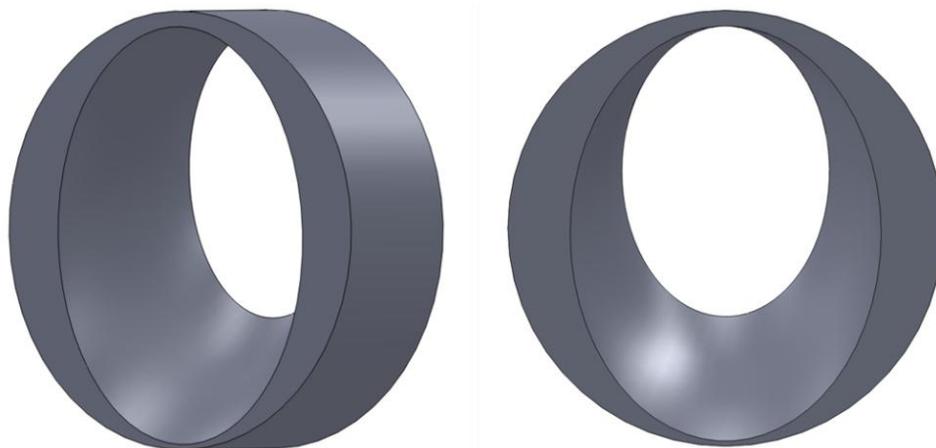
SolidWorks assembly of final slip detection sensor insert used in the study.
